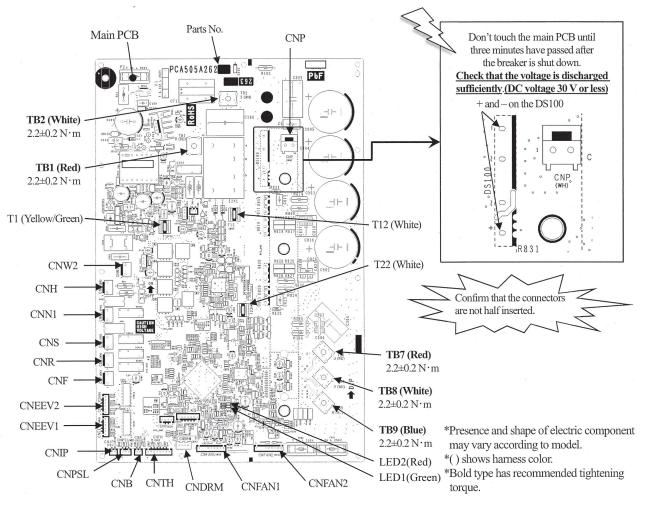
Parts arrangement view of main PCB and voltage measurement points
